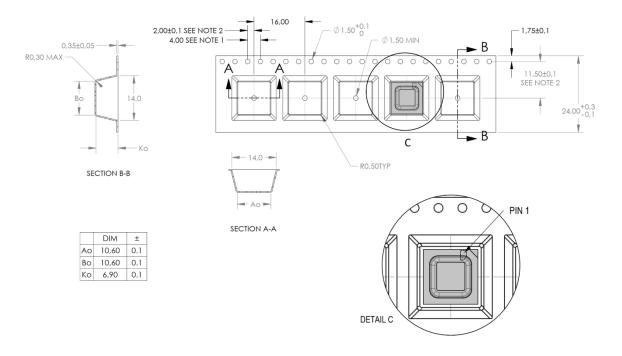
Technical drawing of the packaging tape with sensor orientation in tape. Header tape is to the right and trailer tape to the left on the drawing. Dimensions are given in millimeters.
